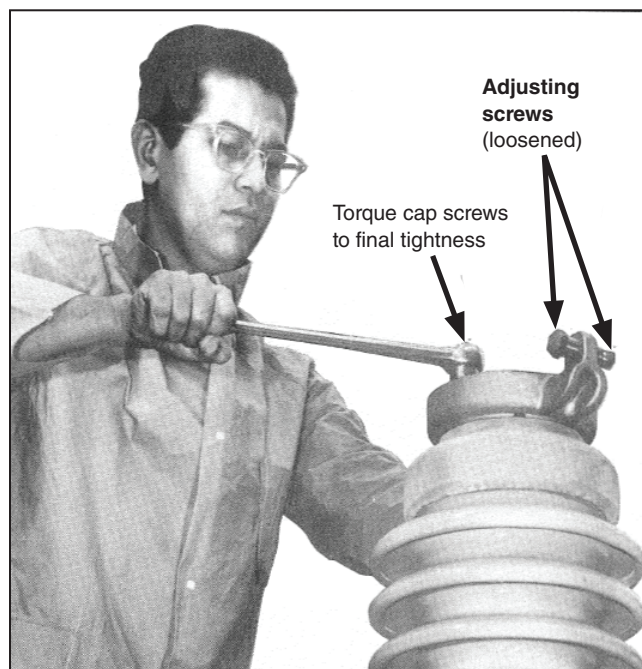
Mounting blade adjustment discs (one on each insulator stack.) 1600 ampere rating shown.
